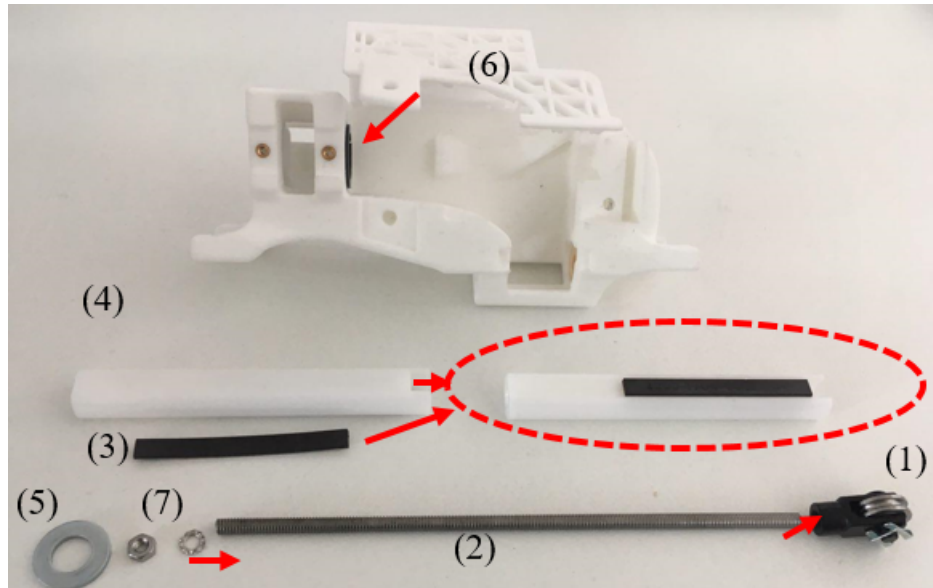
Assemble the pulley yoke and displacement or spring guide shaft
